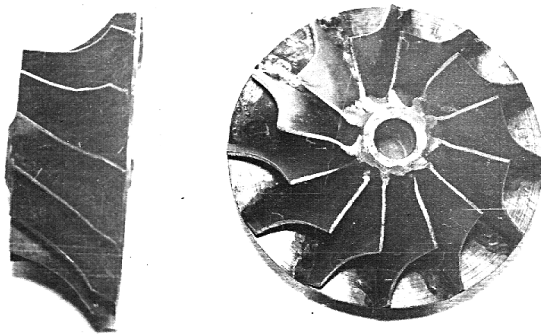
Centrifugal compressor impeller with a straight blade in relative motion
